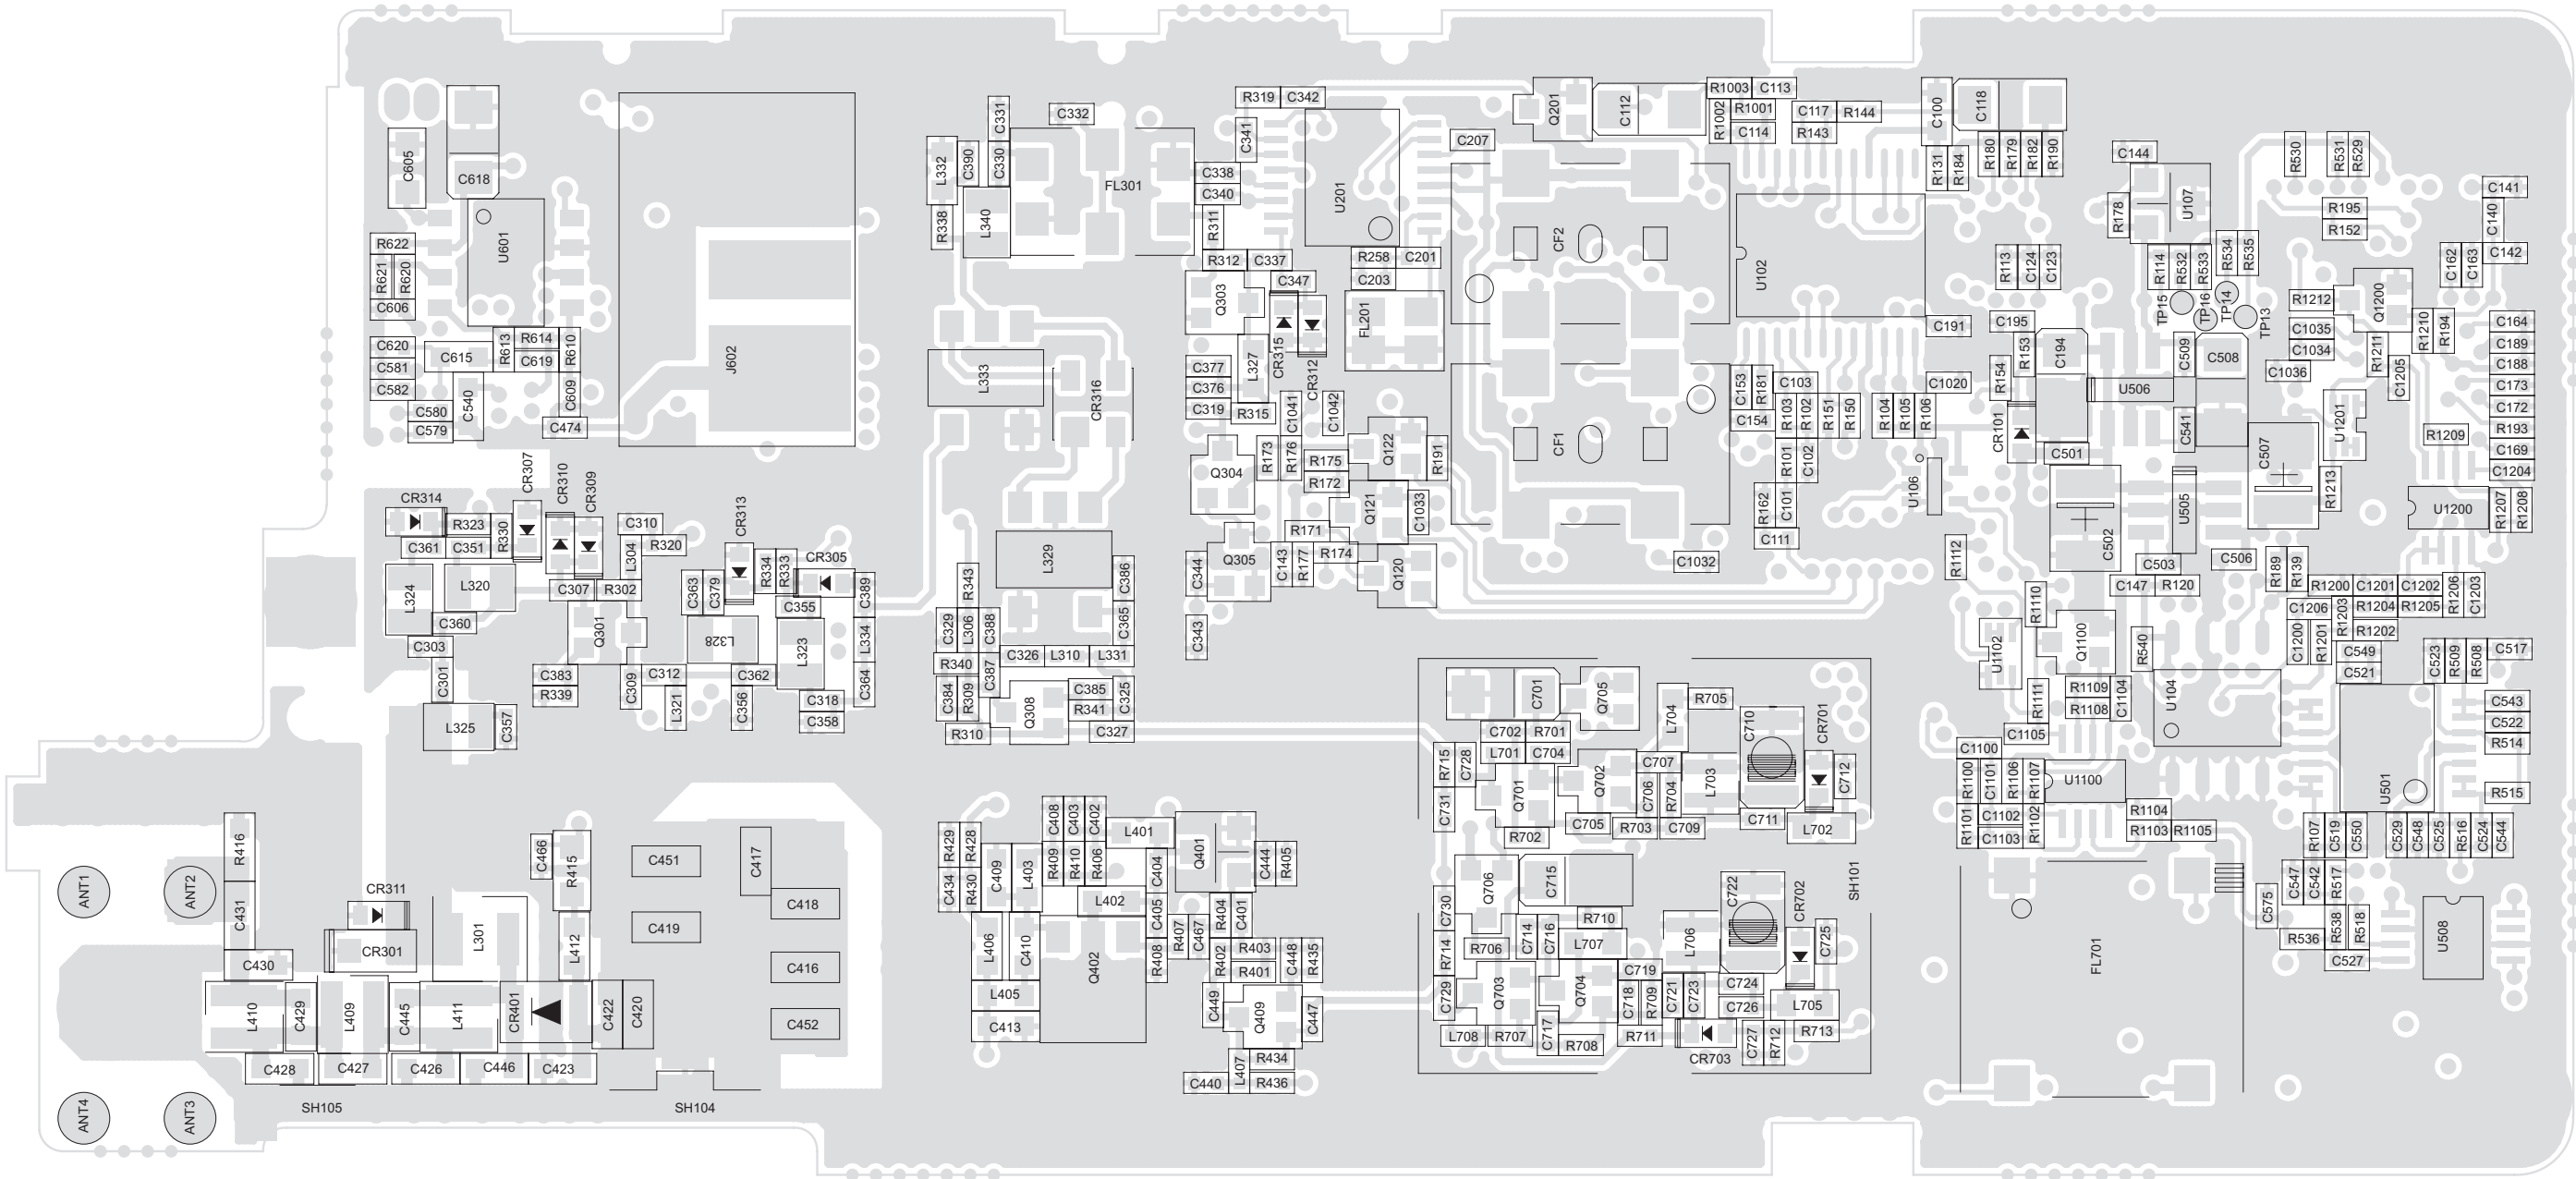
UHF1 (403–447 MHz) Mainboard Bottom Side: PCB No. E11-00946-00
